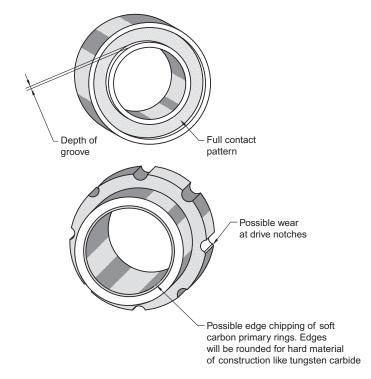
Mechanical seal contact pattern due to high wear and grooving.
